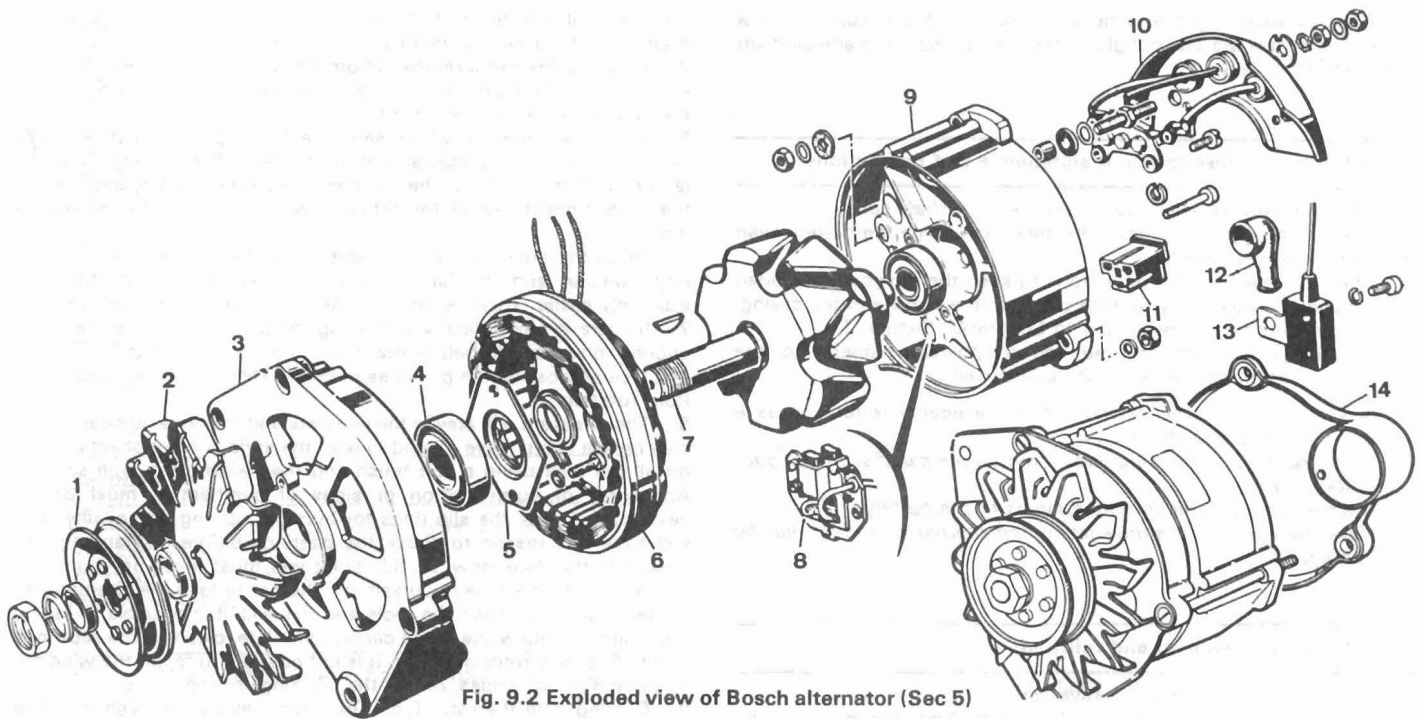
Exploded view of Bosch alternator (Sec 5)
